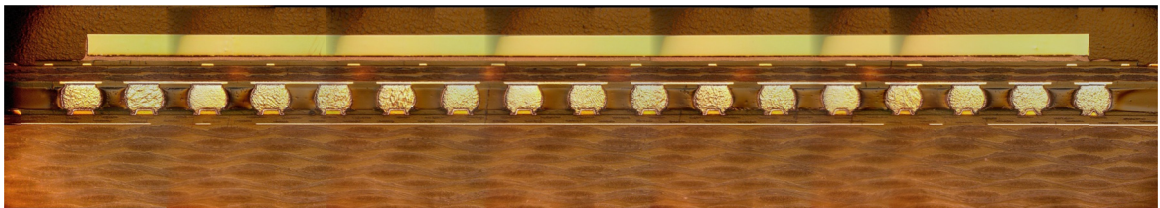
Cross-Section of 15 mm Package [Side Cut]
